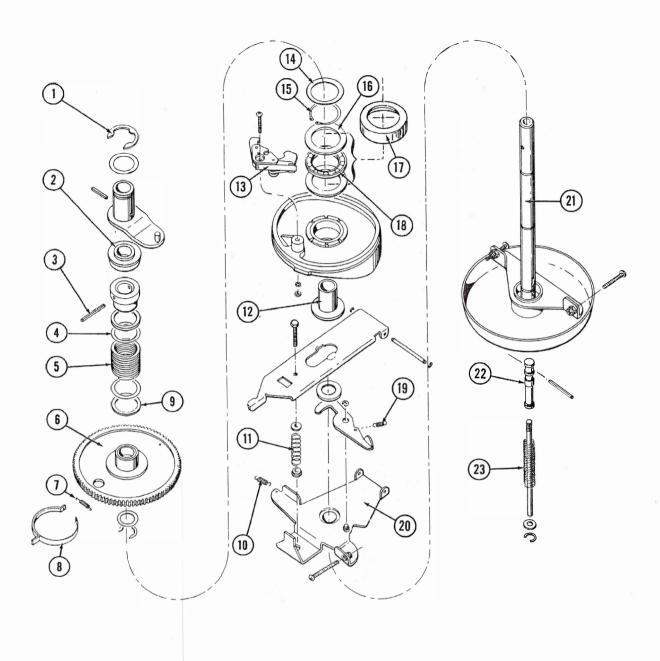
SELECTOR SHAFT ASSEMBLY AND MAIN CAM AND BUSHING ASSEMBLY, 2404 - 2404S
